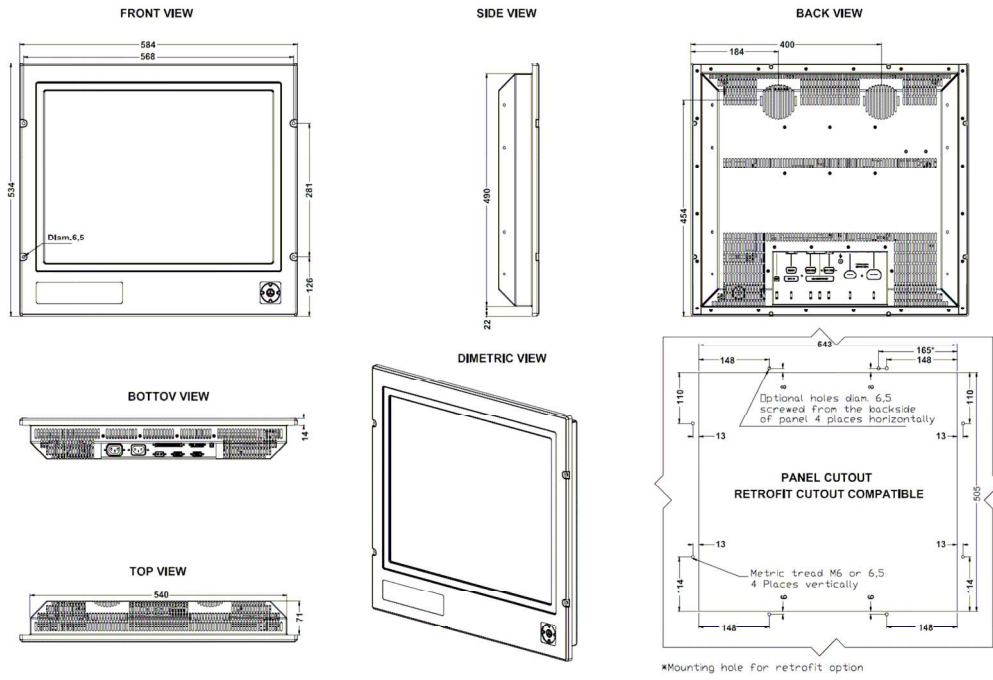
23" TFT Hatteland JH23T12 MMD. Standard View
